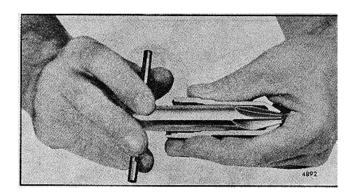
Cleaning Injector Nut Spray Tip Seat using Tool J 9418-5
